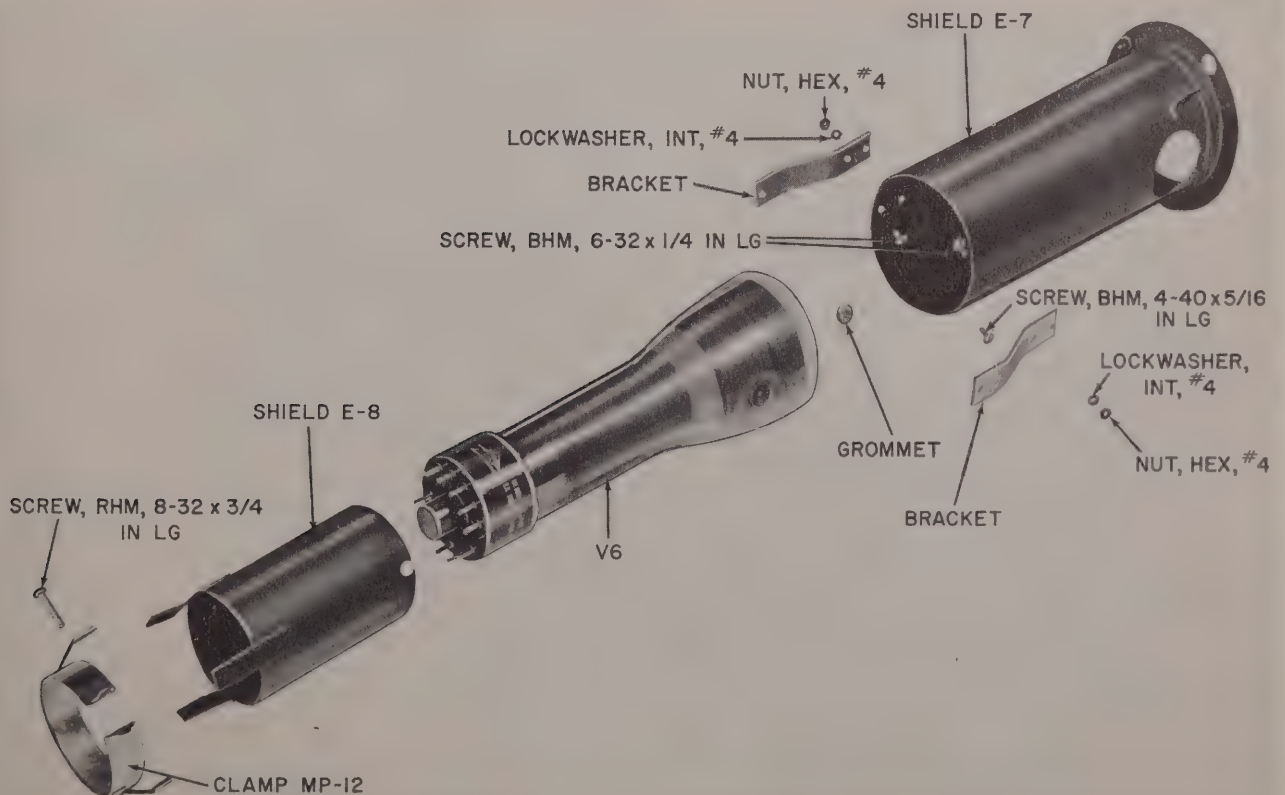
Cathode Ray Tube Shield Assembly, Exploded View
